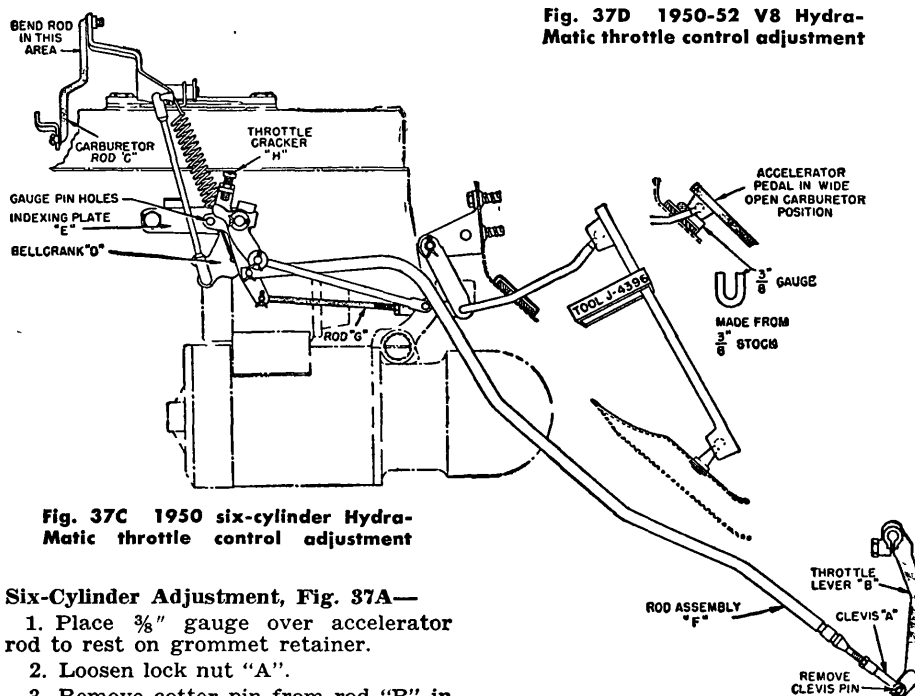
C 1950 six-cylinder Hydra-Matic throttle control adjustment
